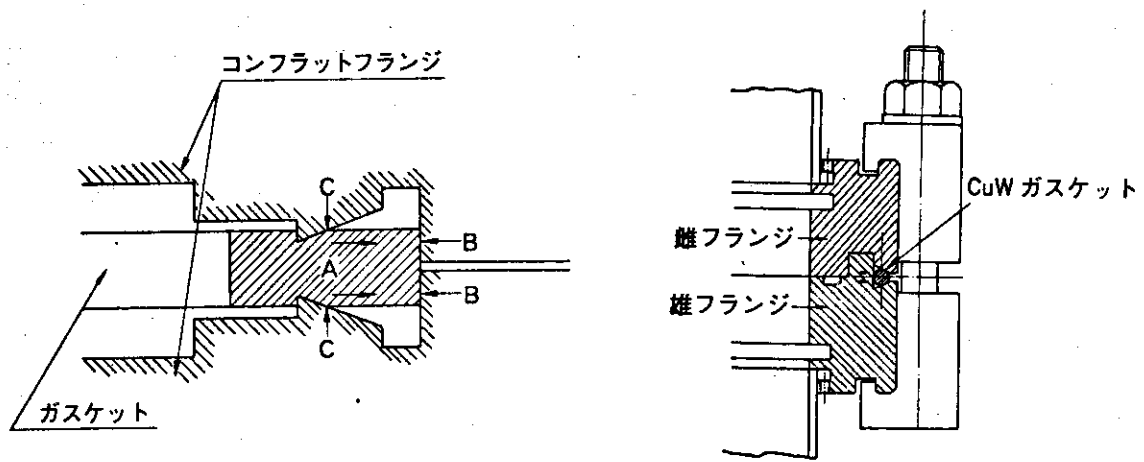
Mechanism of Cone Flat and Hoyler Seal
